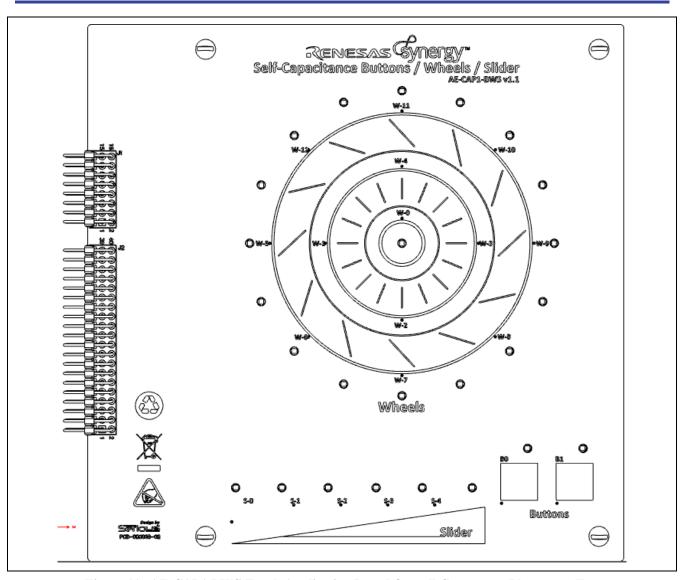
AE-CAP1-BWS Touch Application Board Overall Component Placement, Top
